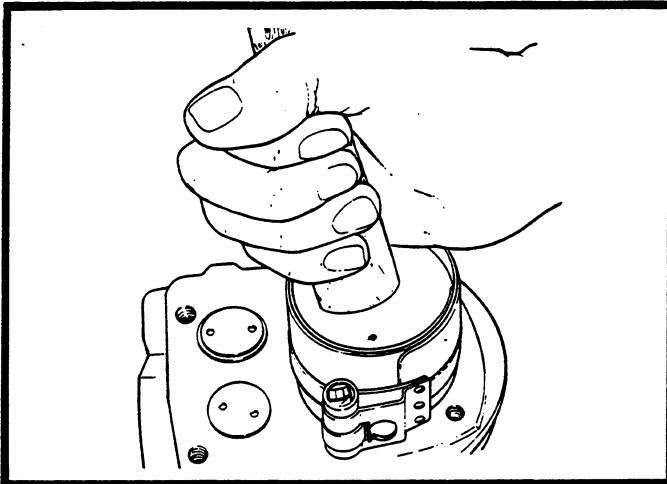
USE RING COMPRESSOR TO INSTALL PISTON
